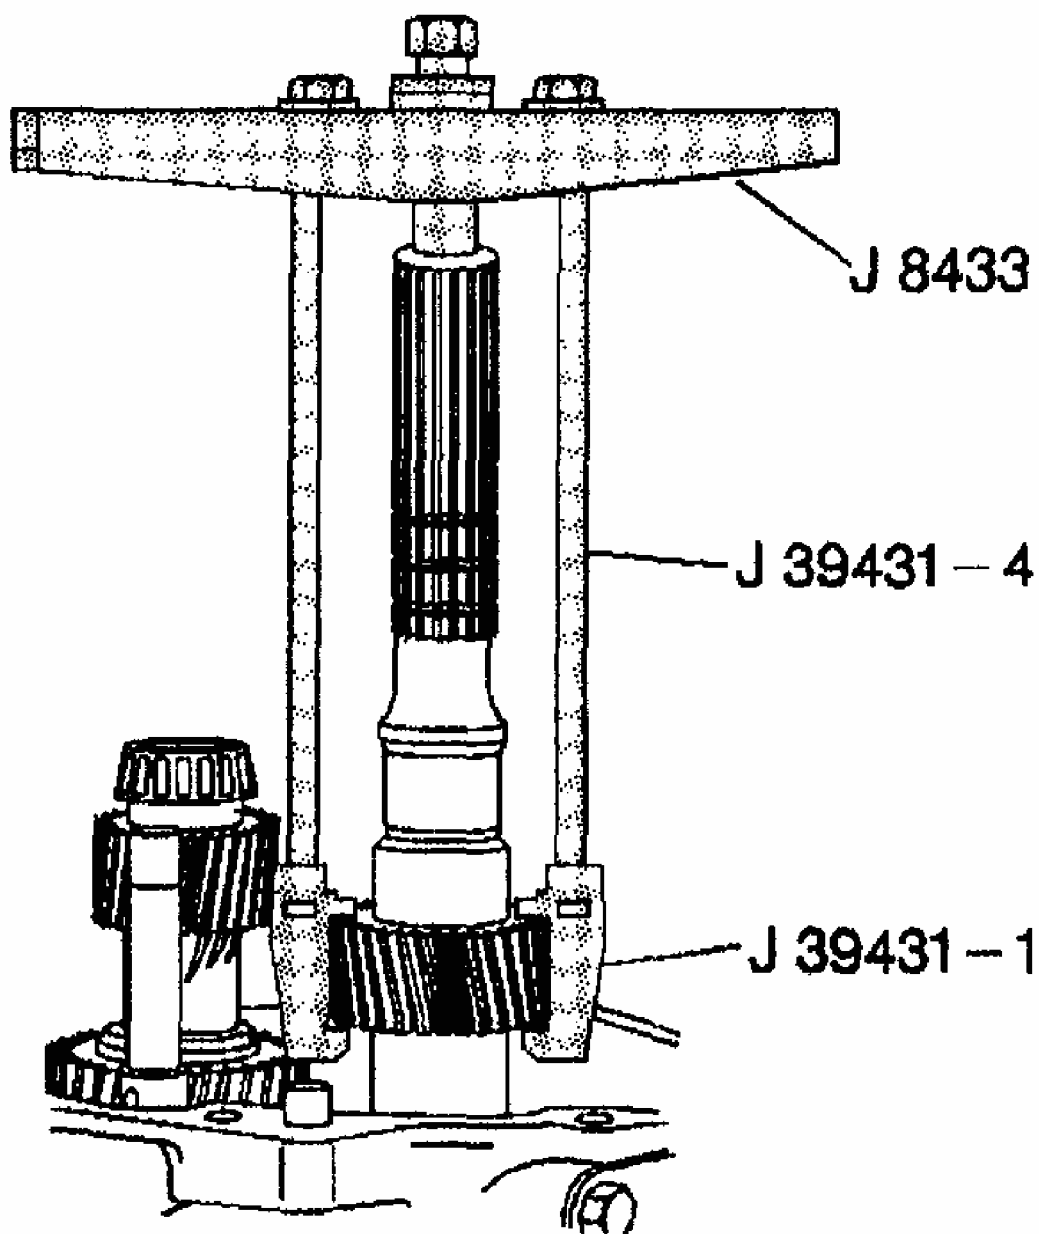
Removing Reverse Synchronizer Assembly & Shift Fork
